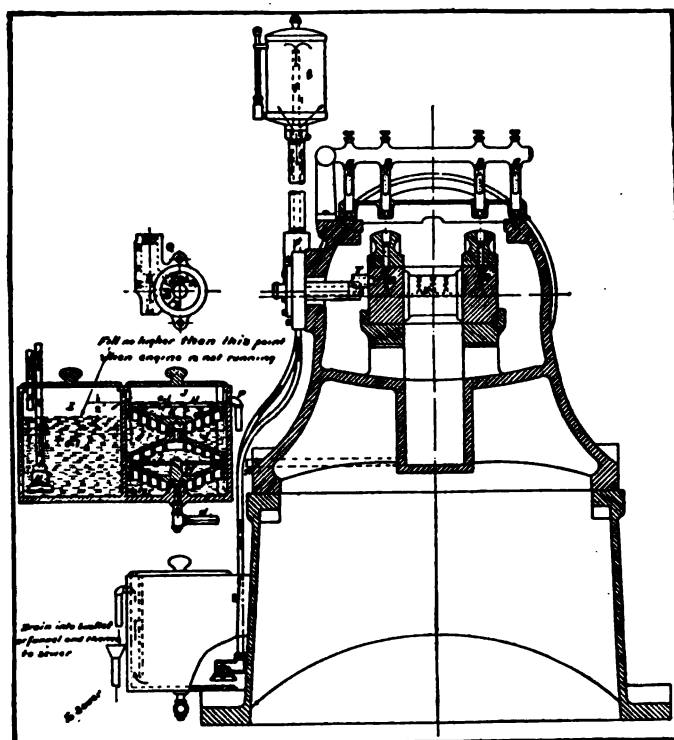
SEC. 7c.—Skinner engine equipped with a pump and oil and water separator.
